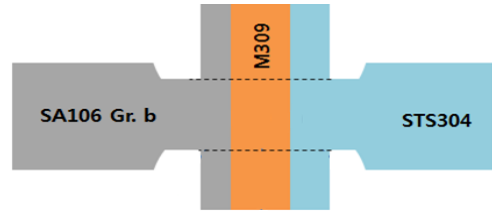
A method for manufacturing a dissimilar welding specimen
